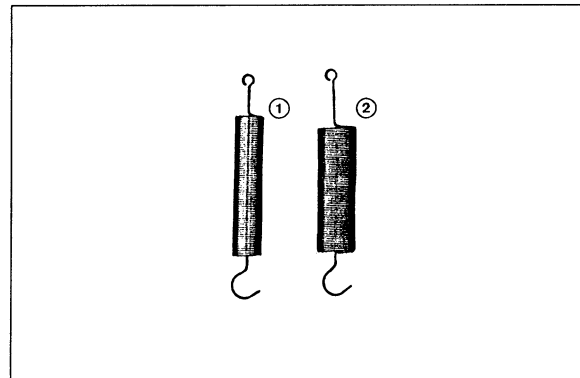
(1) helical spring, 1.5 cm \varnothing
